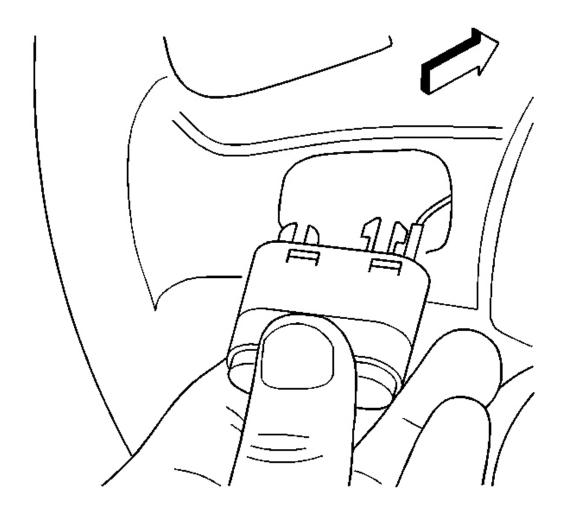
View Of Steering Wheel Control Switch Electrical Connector Courtesy of GENERAL MOTORS CORP.
